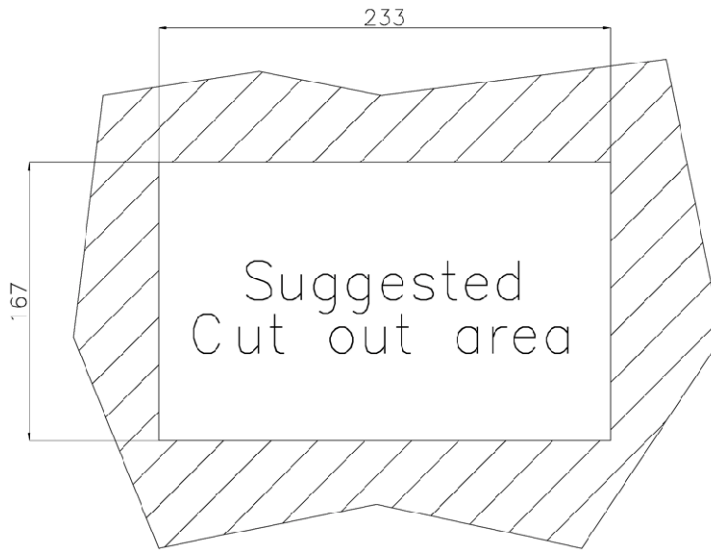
PPC-3708A-N26 Panel Cutout Dimensions
